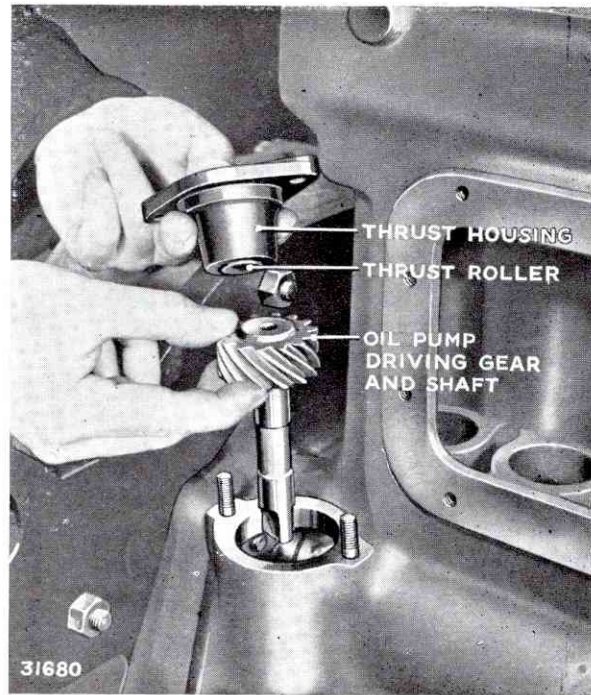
FITTING OIL PUMP DRIVE GEAR AND THRUST HOUSING
